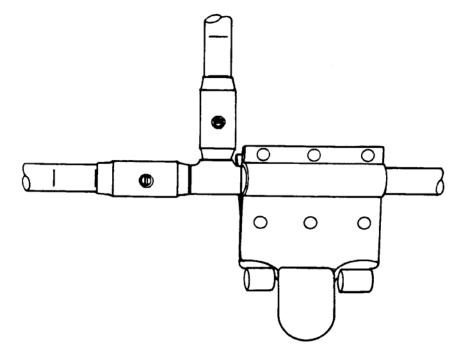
Application of Tube Chiller on Fitting Leg and Tube
